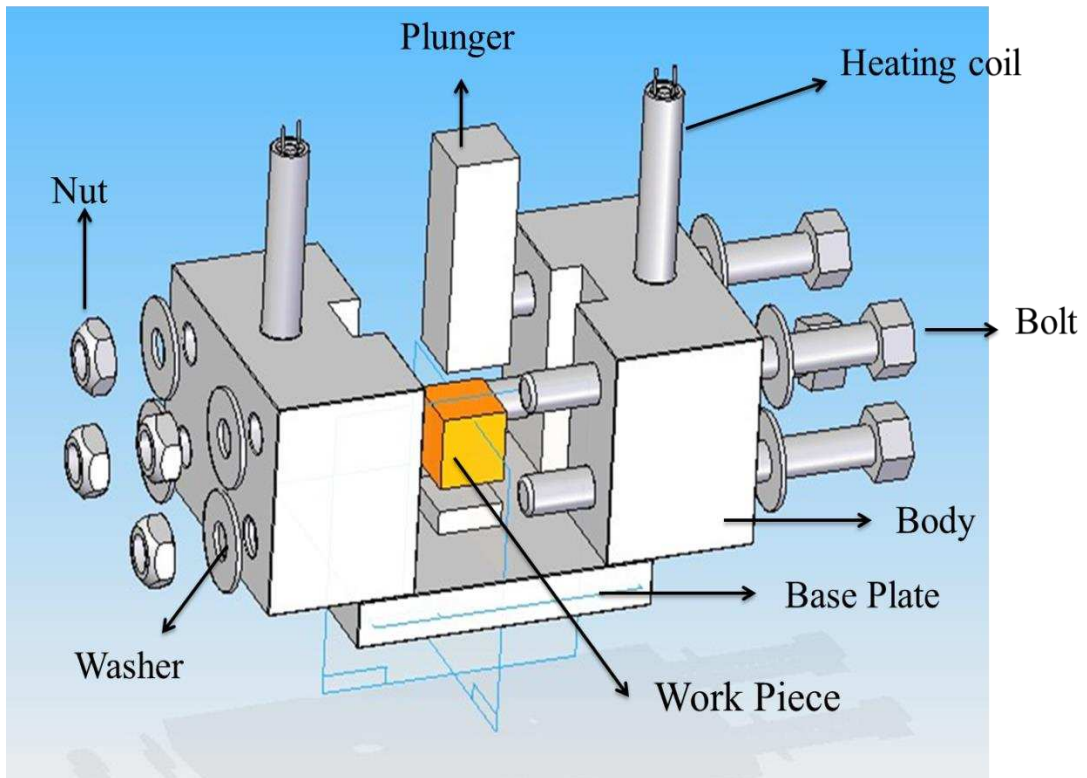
Three dimensional exploded view of the Multi directional forging split type die with plunger.
